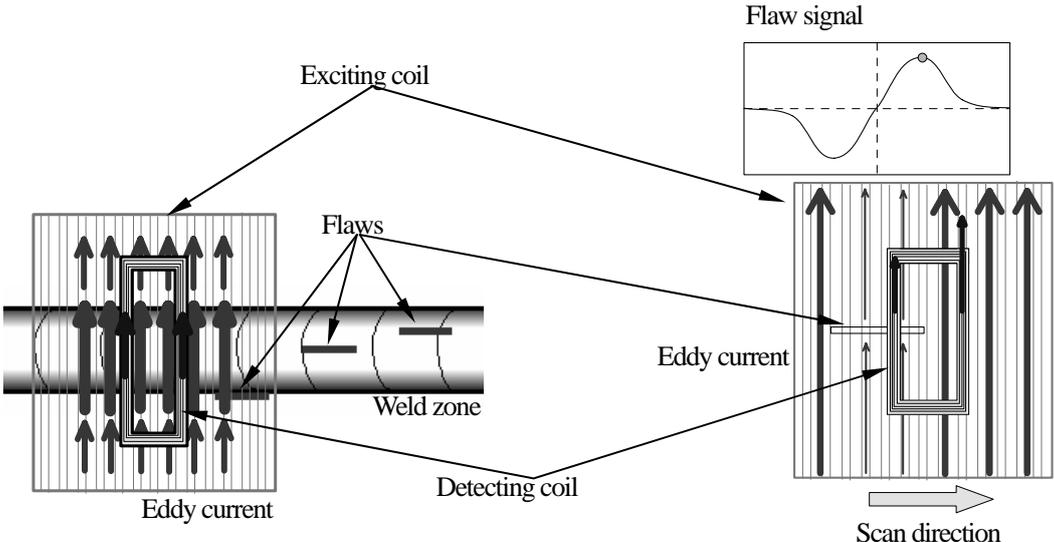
Structure of the uniform eddy current probe used for the detection of weld surface flaws with a single scan.
